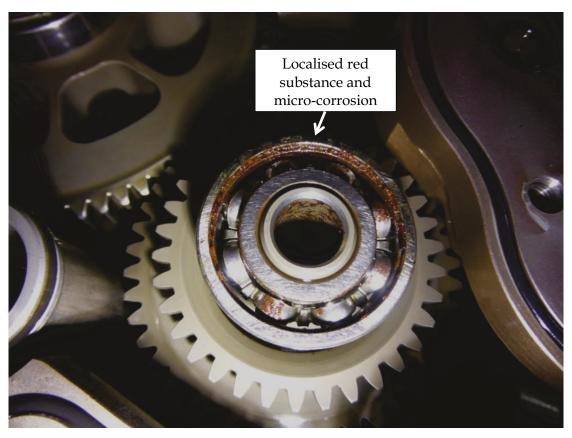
RTM322 accessory gearbox bearing showing the localised nature of the quinizarate and associated corrosion (Image courtesy of Safran HE)
